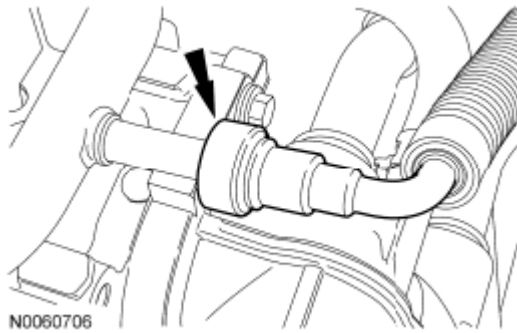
Locating Fuel Supply Tube From Fuel Rail
